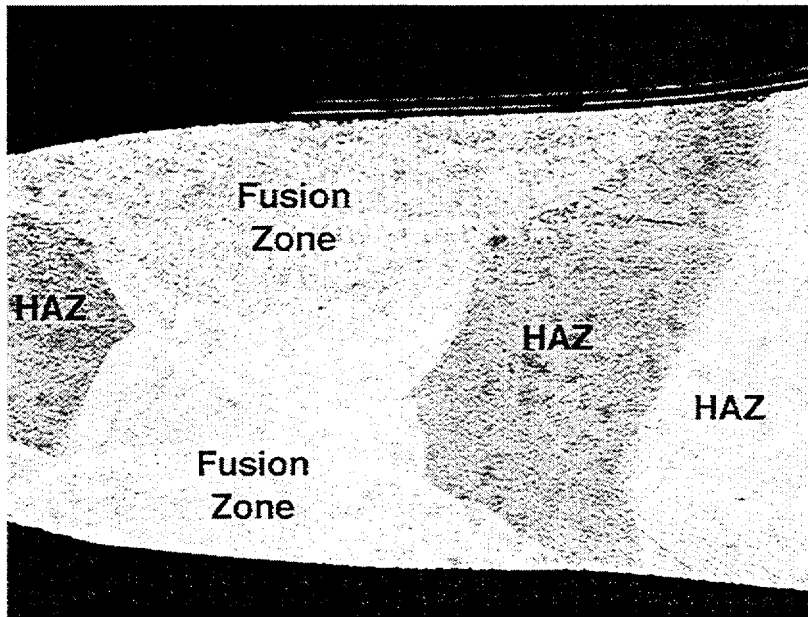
Sample SCV-340 taken from vertical weld seam at location 340° in lower conical shell section.
